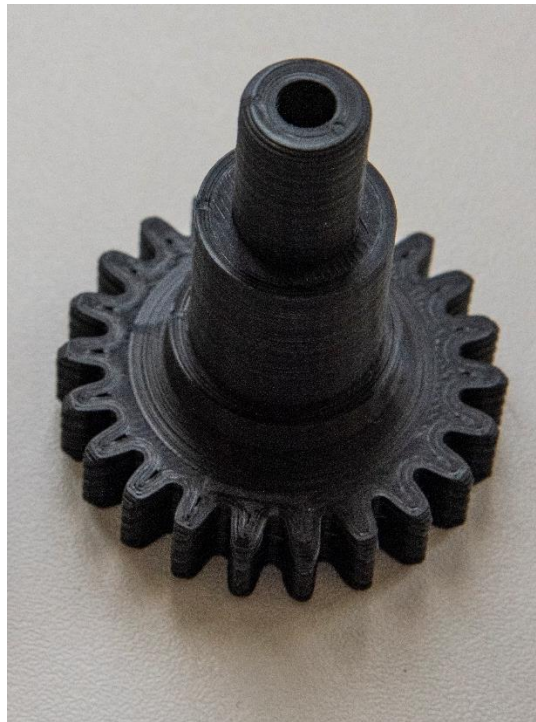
Coupling gear wheel between the encoder and the rotating solar B
